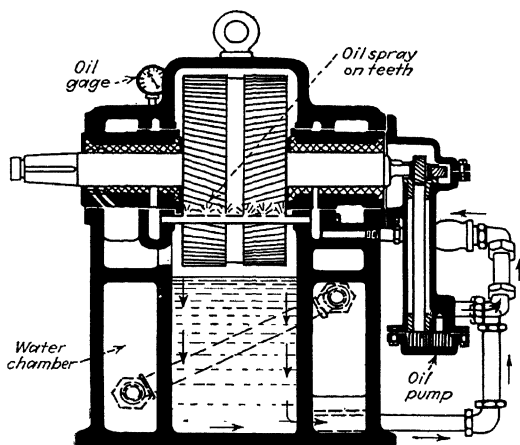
Self-contained reduction gear set. (Courtesy Socony-Vacuum Oil Co.)
